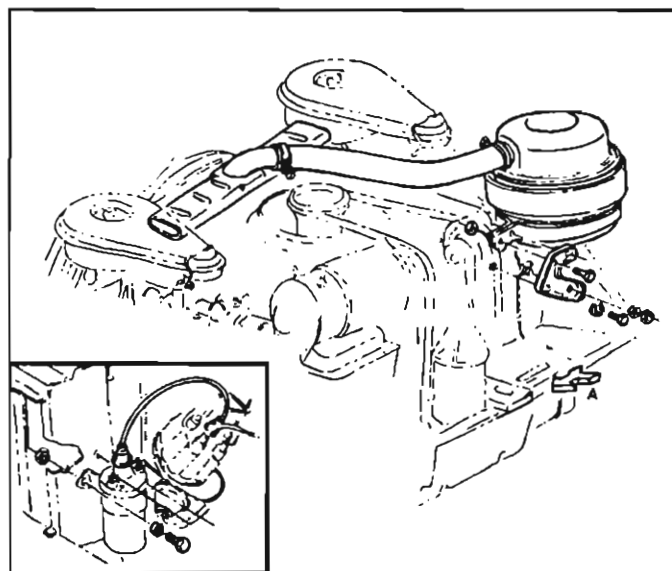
Pre-cleaner Air Cleaner (R-10)
